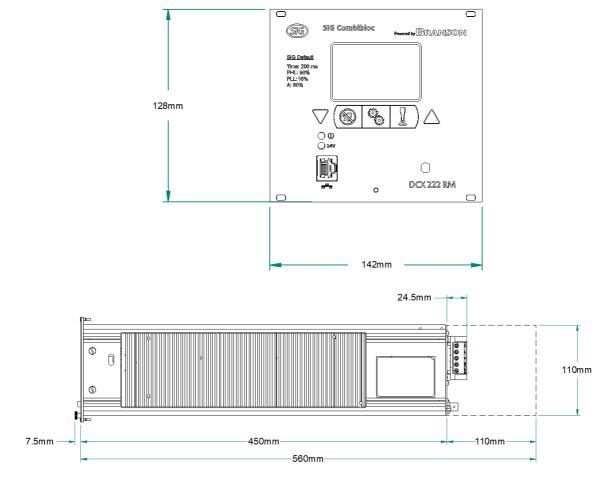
DCX 222 RM SIG Power Supply Dimensional Drawing (Medium)
